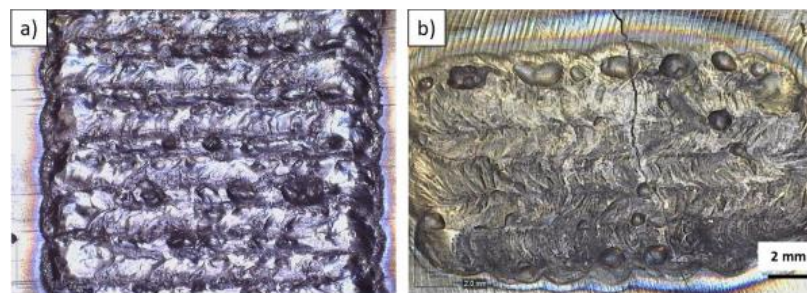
Image of laser cladded surfaces: a) compliant deposits; b) non-compliant deposits with cracks
